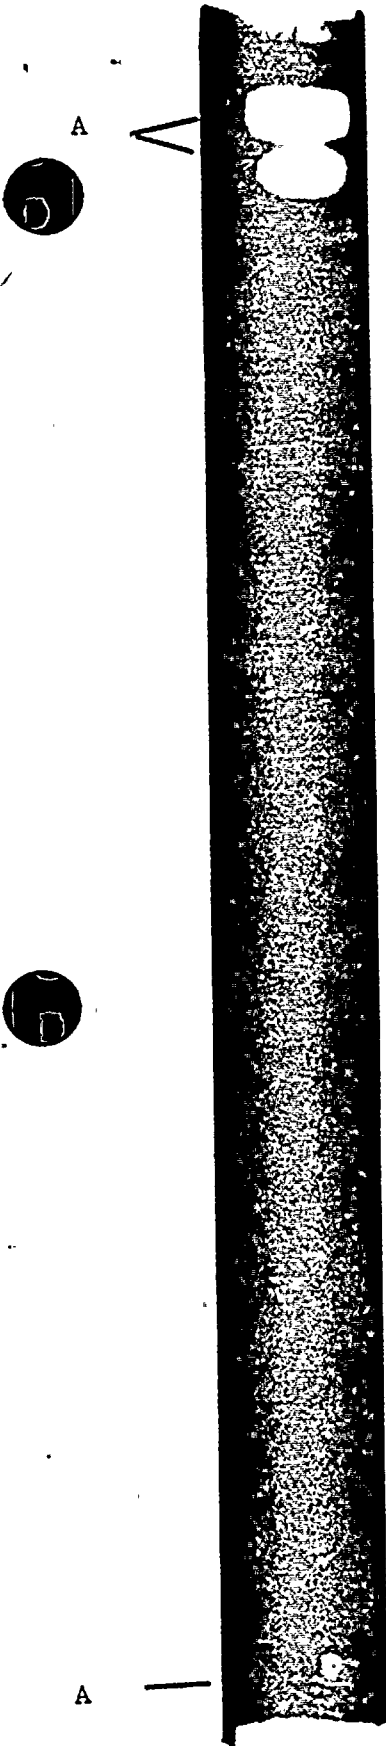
Print of 45° double wall X-ray radiograph for Tube R43-C61 from the hot leg of "B" steam generator and Cutting diagram. Topography of Spots A was like that of cut tube and indicating they resulted from cutting tool strikes. Rings examined as for Tube R43-C60.
